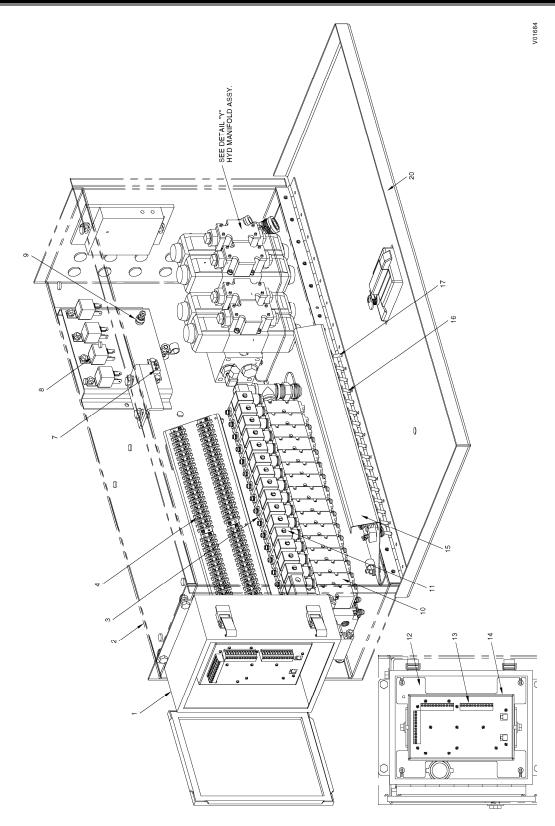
(Sheet 2). Valve Box Assembly (Late)
